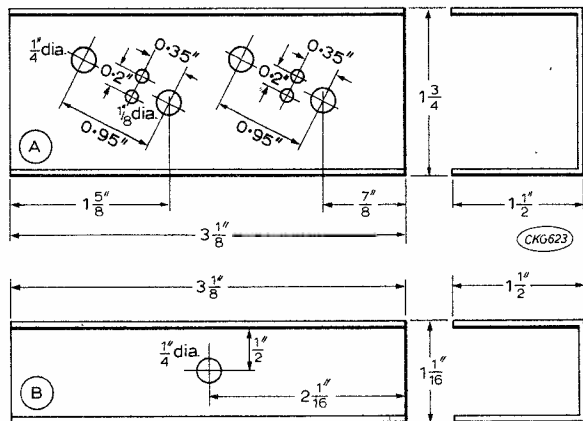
Heat sink details, in 16 s.w.g. aluminium.
